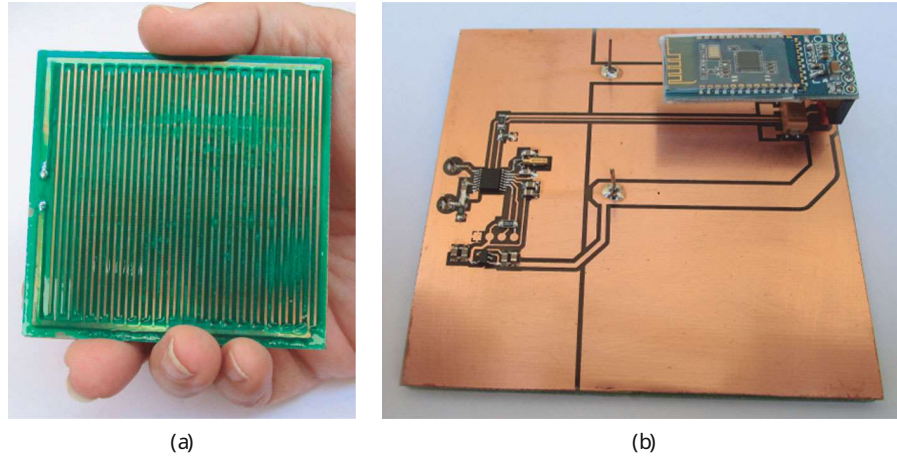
PCB smart sensor: (a) bottom side and (b) top side [25].
